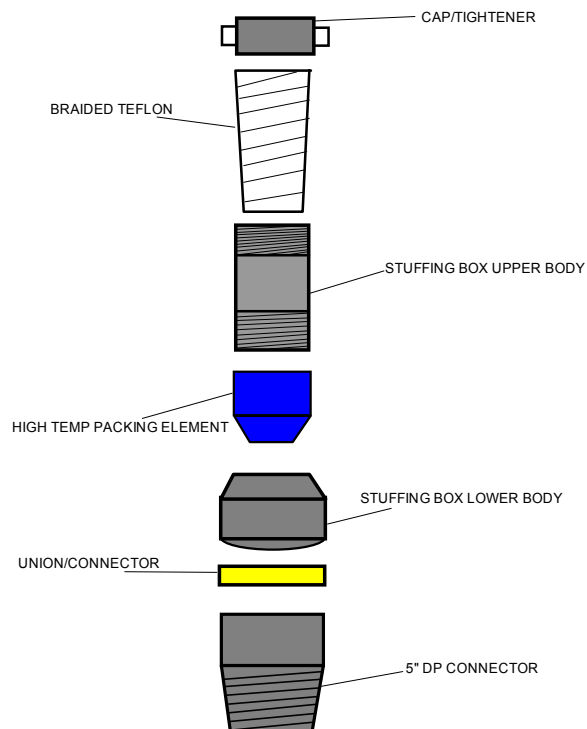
Pack-off assembly for the APO-1D sucker rod set-up
